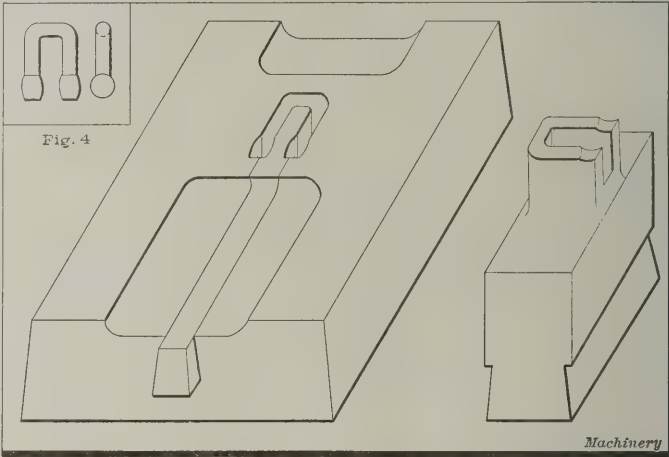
The Trimming Die Fig. 4. Details of Forging
